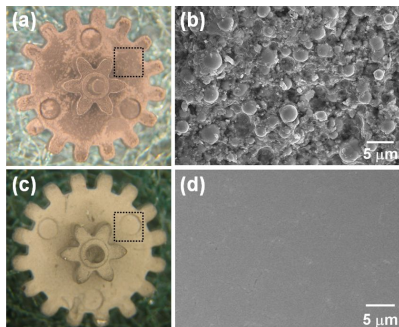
The features of injection molded double gear. (a,b) green part, (c,d) sintered part.
